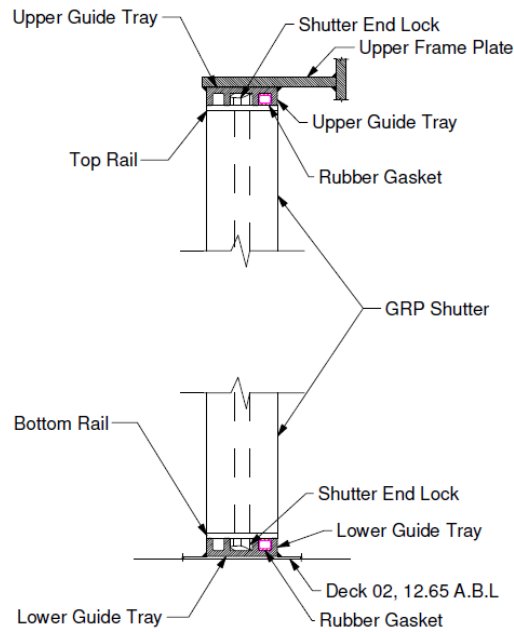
Example shutter assembly, top and bottom rails, vertical section (side view)
